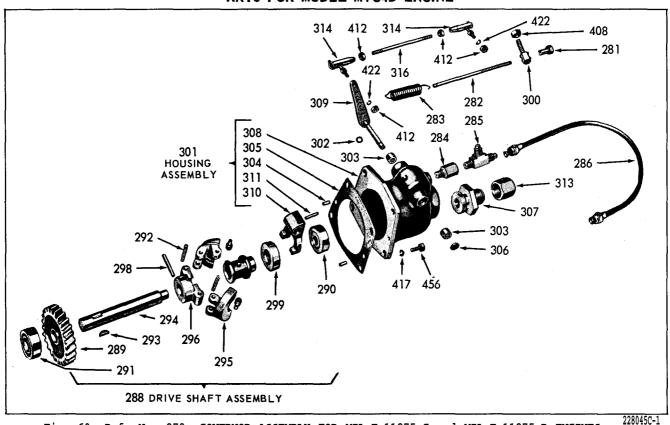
, Ref. No. 279, GOVERNOR ASSEMBLY FOR MIL-E-11275-C and MIL-E-11275-B ENGINES
